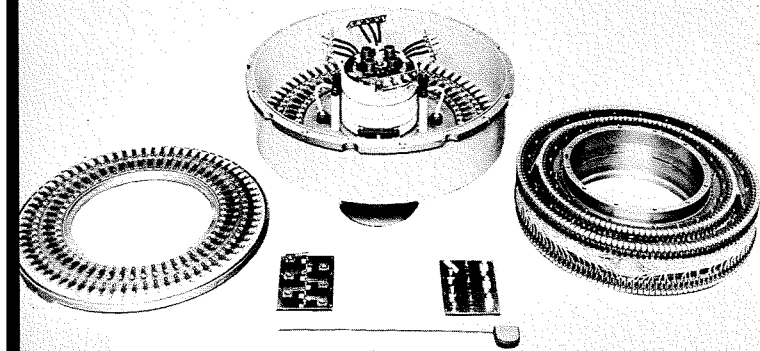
This novel slip ring assembly, utilizing a system for switching through segmented disk assemblies, permitted a much more compact design than would have been possible with conventional slip ring techniques.
